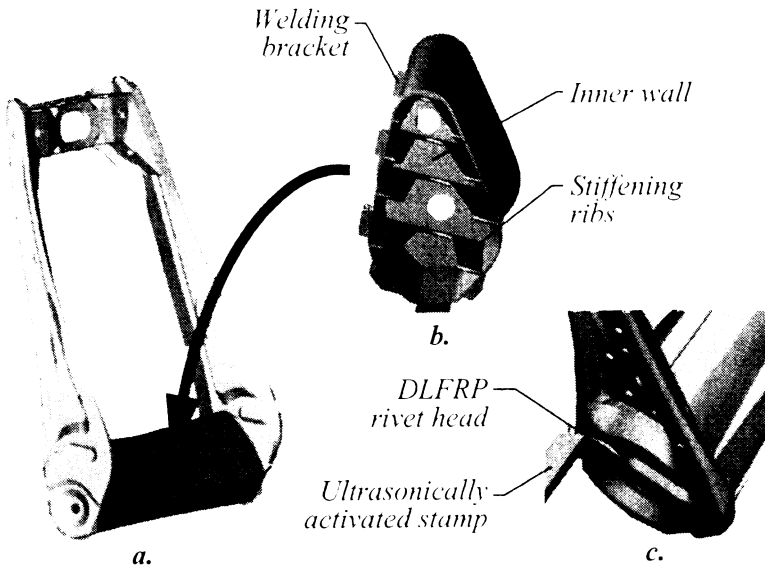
a., b.: Assembled back rest structure with tube like lower DLFRR crosshead, c.: rivet welding joining procedure .
